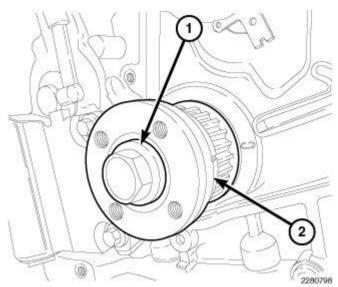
Crankshaft Timing Belt Sprocket & Bolt Courtesy of CHRYSLER LLC
